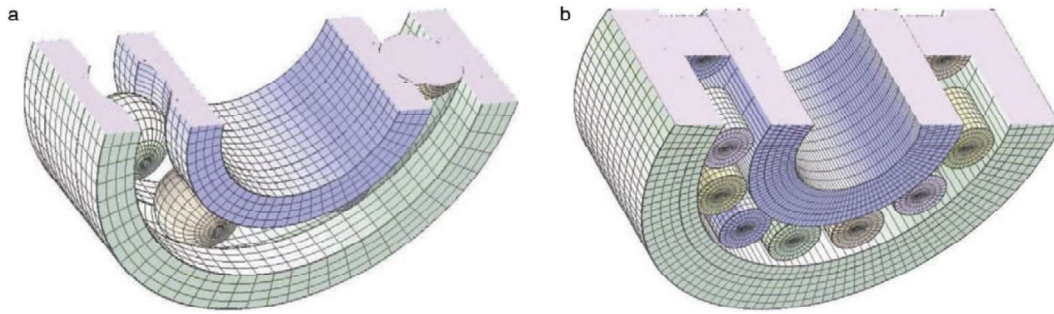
Section View of a Ball Bearing and a Double Row Cylindrical Bearing [17]
